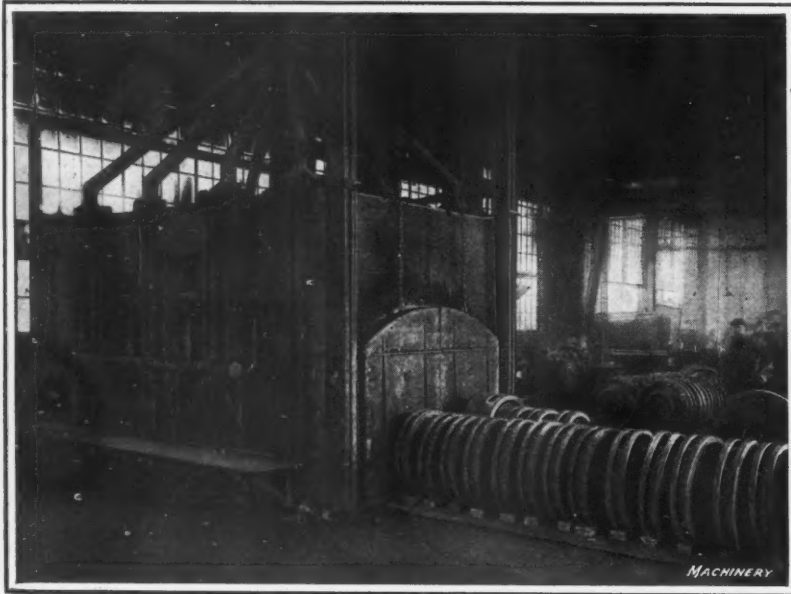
View of an Annealing Furnace, showing a Charge of Steel Disk Wheels Ready to be heat-treated
